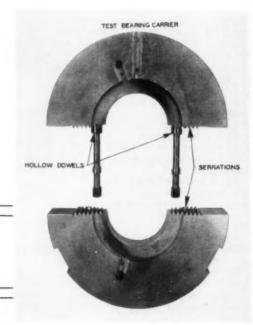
By combining dowels with serrated test bearing carrier split faces as shown, out-of-round can be held within 0.001 in. in 41/6 in, diameter bore after 2000 hours of of use.
